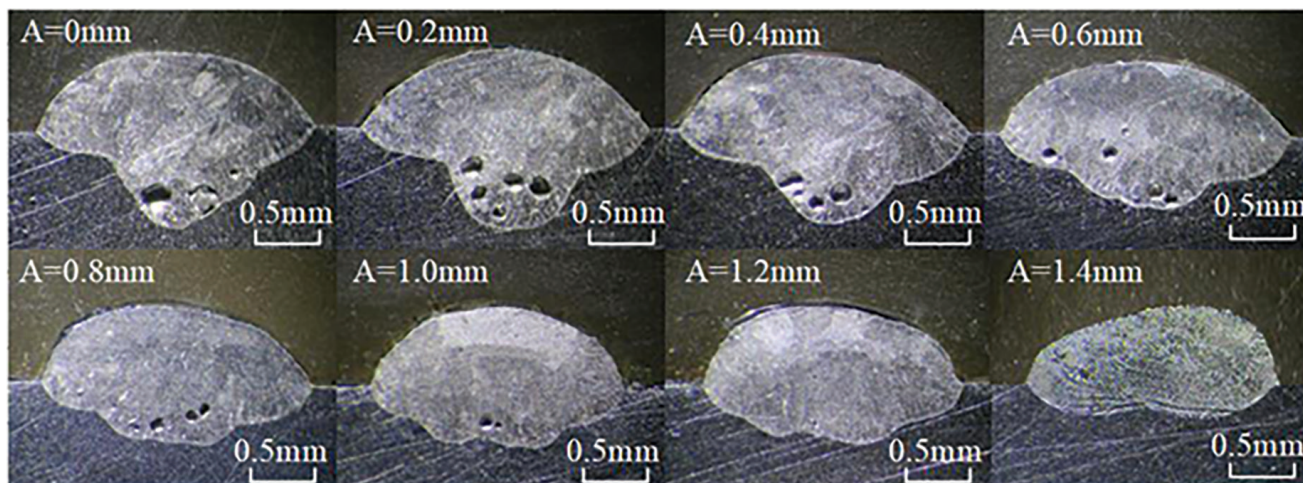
Cross-section of the weld pool with different oscillation diameters.
